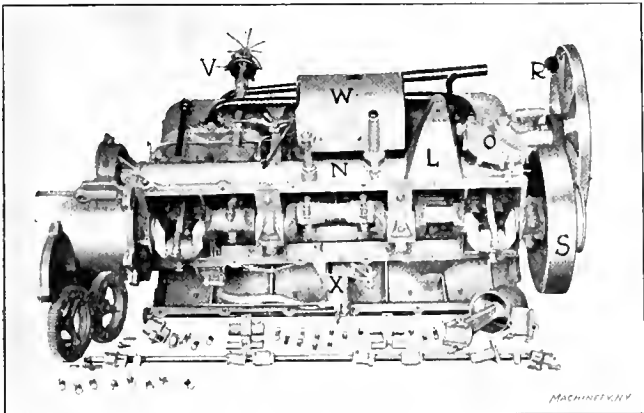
View of Engine from Beneath, showing Removal of Piston, Cam, and Lay-shafts, etc., without Dismantling
